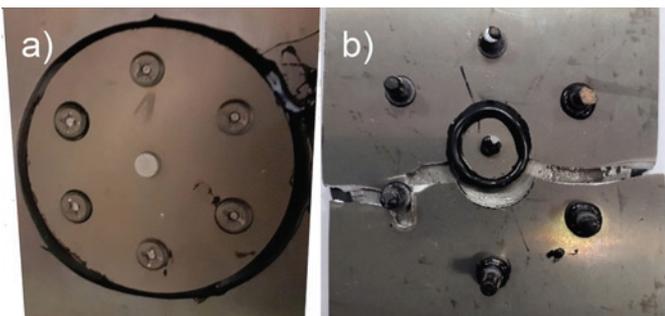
View of a hybrid strapped joint (MBF2110AB-05-150 rivets and Raychem S1125 compound): (a) after preparation of specimen, (b) damaged in durability tests
